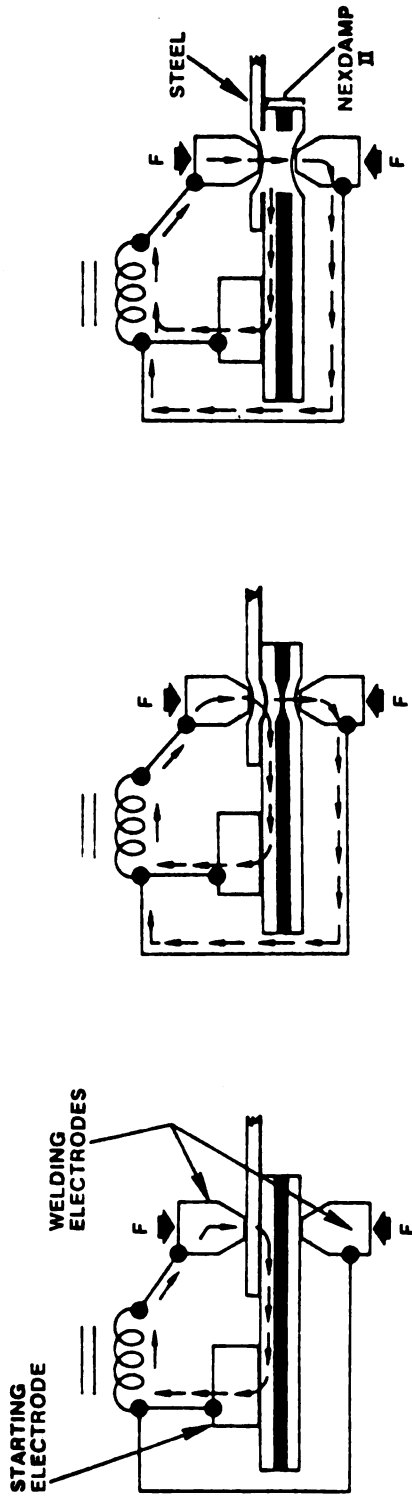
MAKING THE FIRST WELD WITH STARTING ELECTRODE
